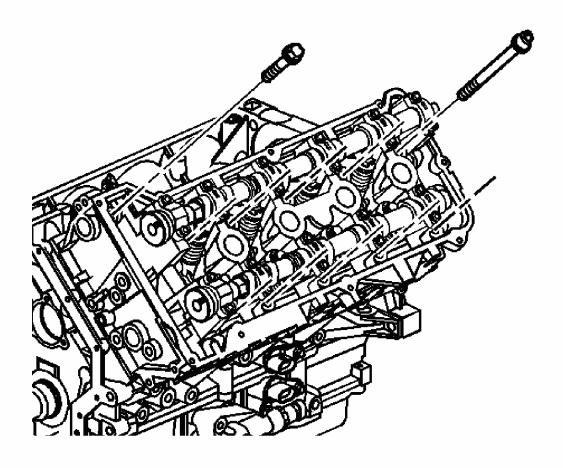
Locating Cylinder Head External Drive Bolts Courtesy of GENERAL MOTORS CORP.
